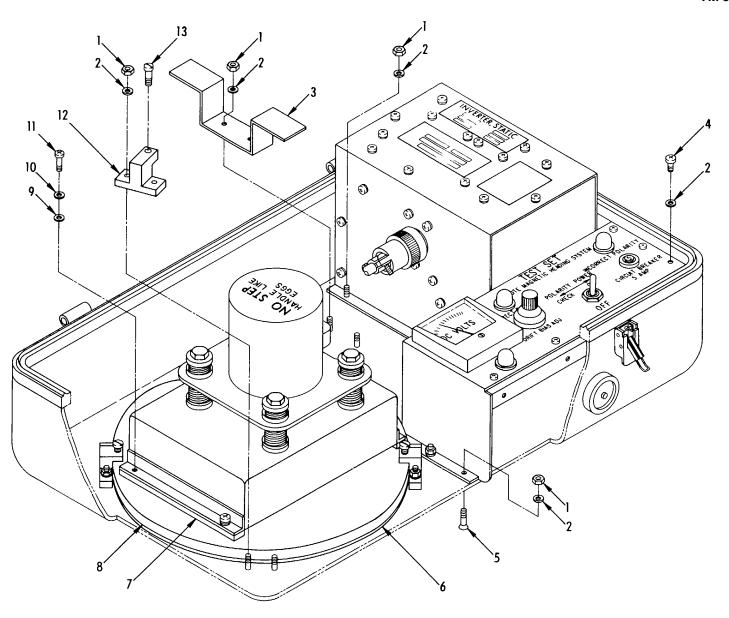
CASE ASSEMBLY (SHEET 1 OF 2)
